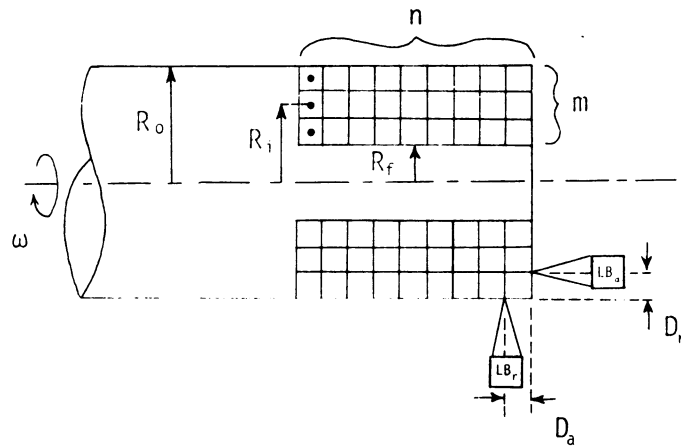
Workpiece Configuration for Laser Turning--Rings with Identical Dimensions
